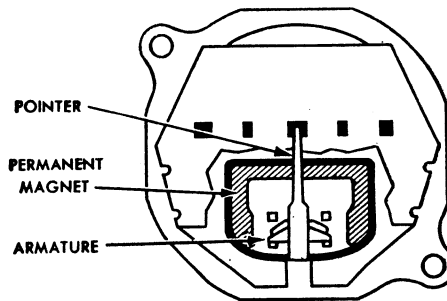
Drawing of a typical ammeter or battery charge indicator
